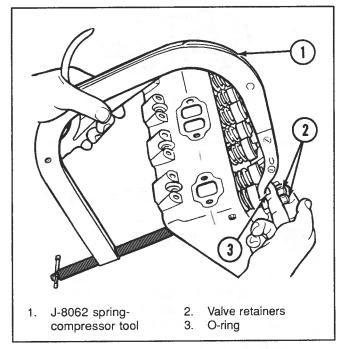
Compressing Valve Spring With Cylinder Head Removed
